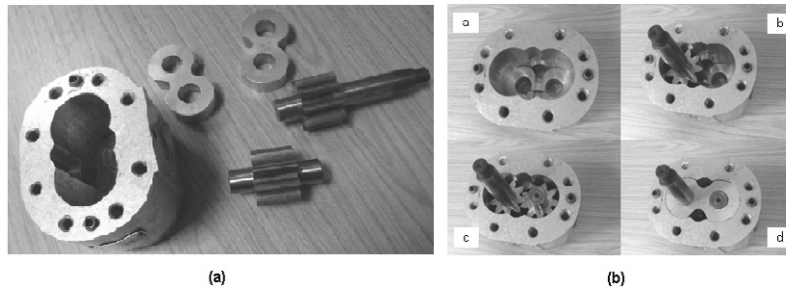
(a) Pump components: housing; top plate; bottom plate; small cog; big cog. (b) Assembly sequence of the pump components.
